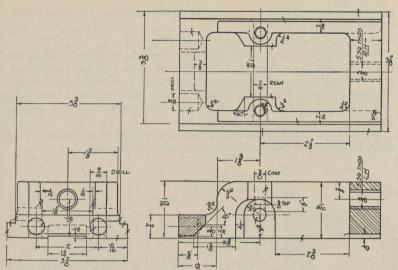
An incorrect drawing to be checked for errors (sliding block).
